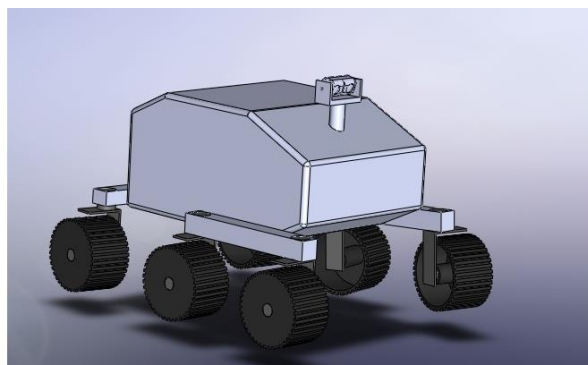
Cad drawing of lunar micro-rover design 02.
